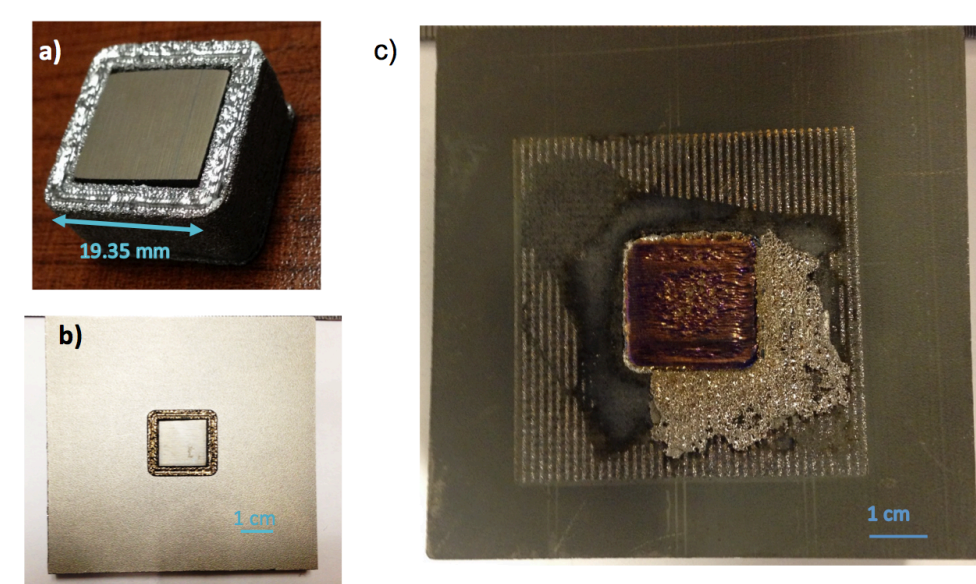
Fabricated "Smart Parts", (a) piezoceramic sensor and insert part, (b) bottom part press fitted in the mask plate, and (c) fabricated "smart part".
